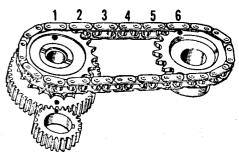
View of timing marks on crankshaft gear, idler gear, sprocket and camshaft sprocket. Ignition timing chain and camshaft timing chain must be installed on idler gear sprockets and camshaft sprocket before installing gear and camshaft sprocket.
